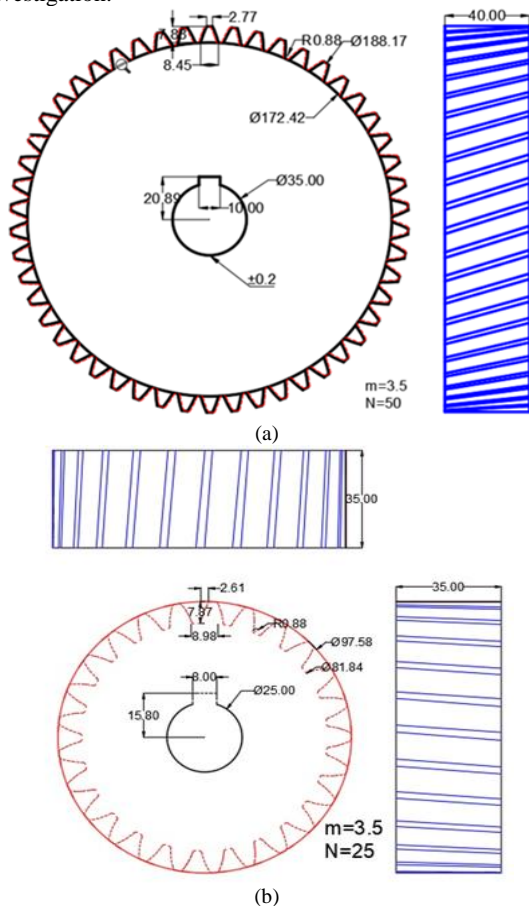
Gear model for the rotational system: (a) Helical gear dimensions; (b) Key and module
